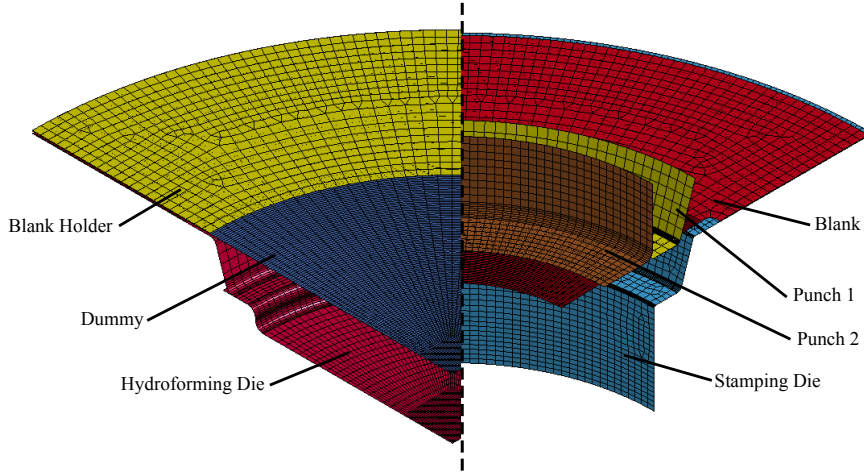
Parts included in the simulation, the parts of the hydroforming operations is on the left, and the stamping parts on the right. The blank holder and blank is used in both operations.
